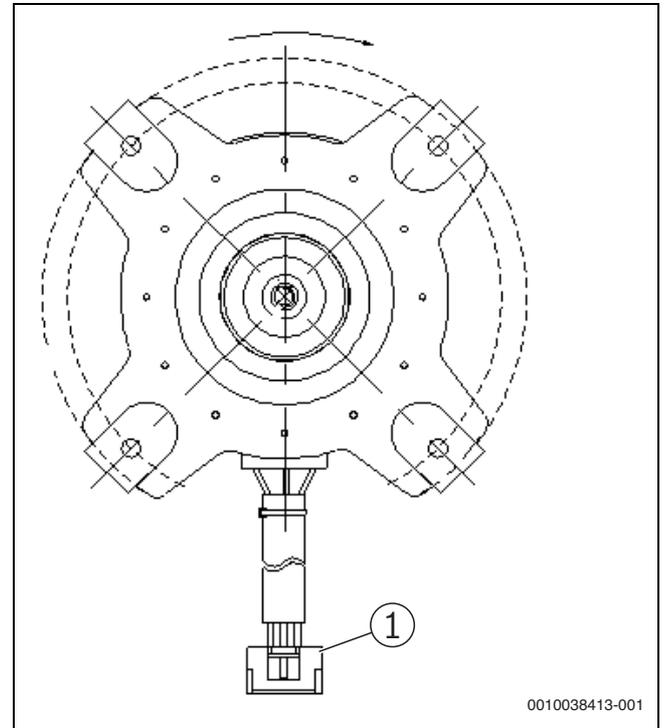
Fan motor connector (the control chip is in the outdoor PCB)
